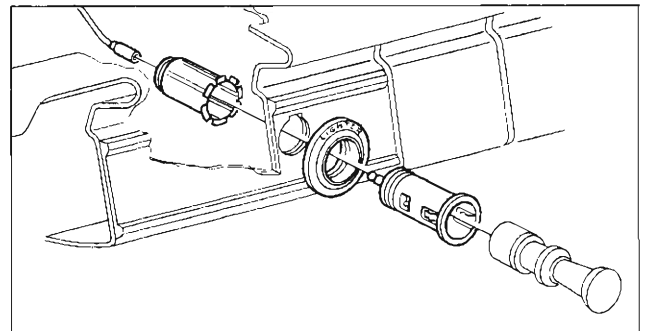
Cigarette Lighter Assembly (Chevrolet Shown)
